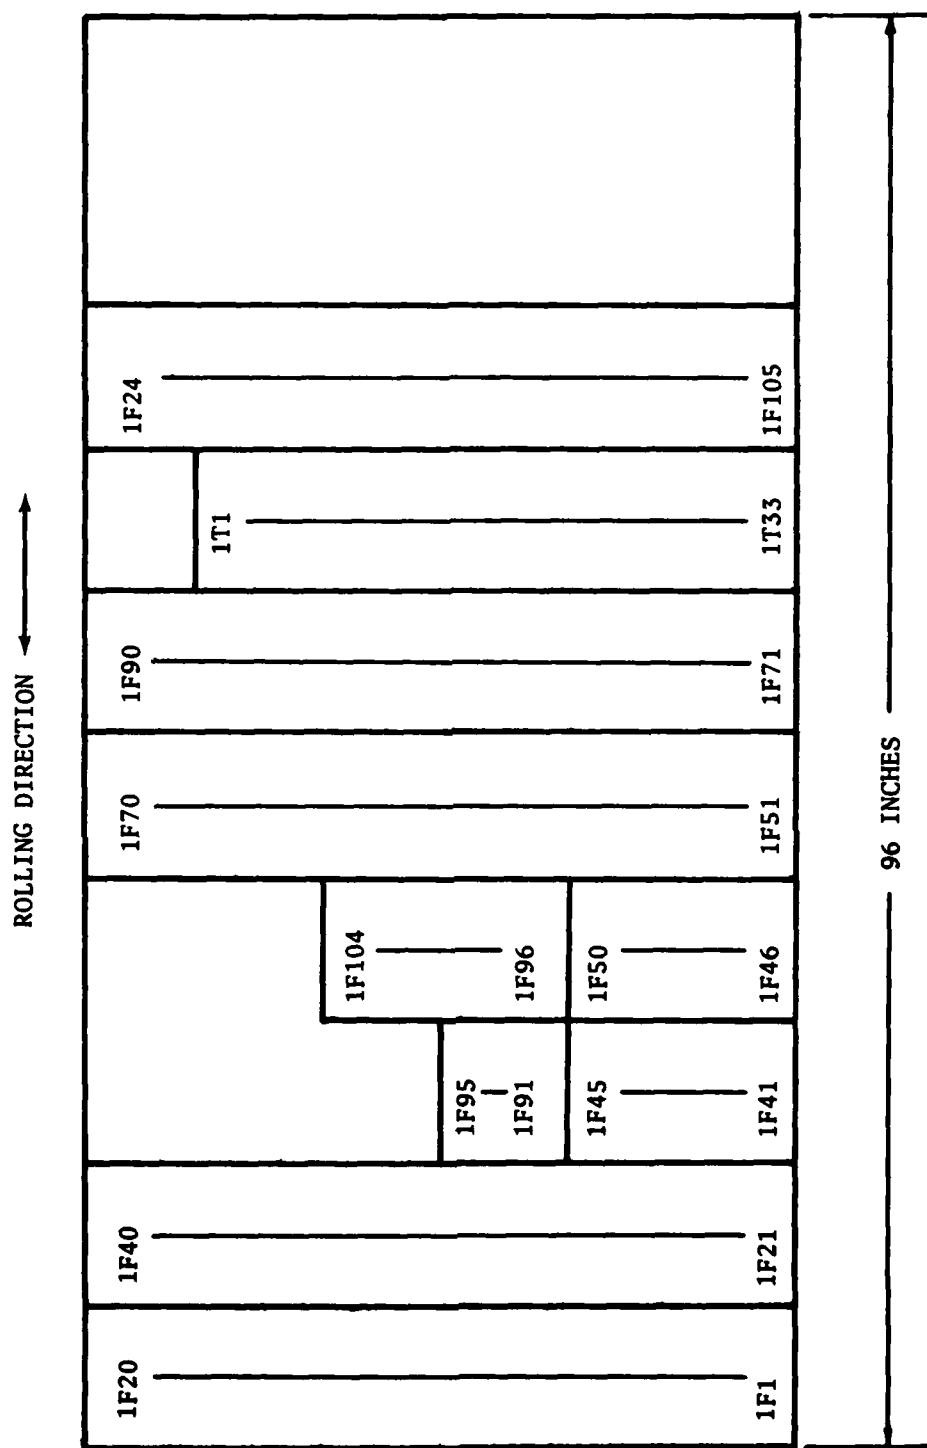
Test Coupon Layout - Phase 1 Specimens
